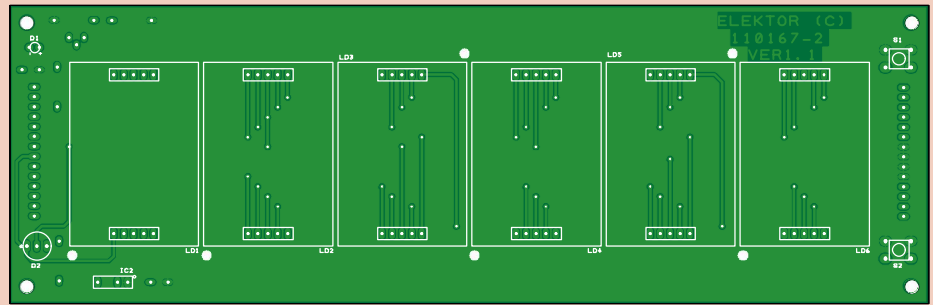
Separate printed circuit boards were designed for the microcontroller display sections, both using DesignSpark PCB. Boards shown at XX per cent of actual size. The display board accommodates Kingbright 1.5-inch (38 mm) SA15-11SRWA 7-segment displays.
